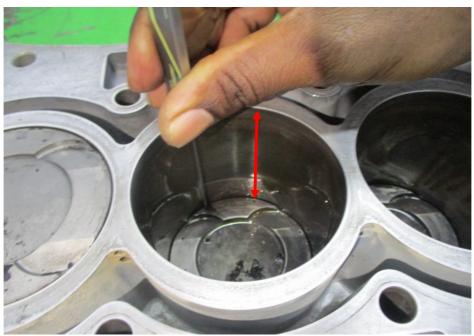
shows measurement of the stroke (arrowed) for cylinder 2 of the BMW engine that I had inspected.
